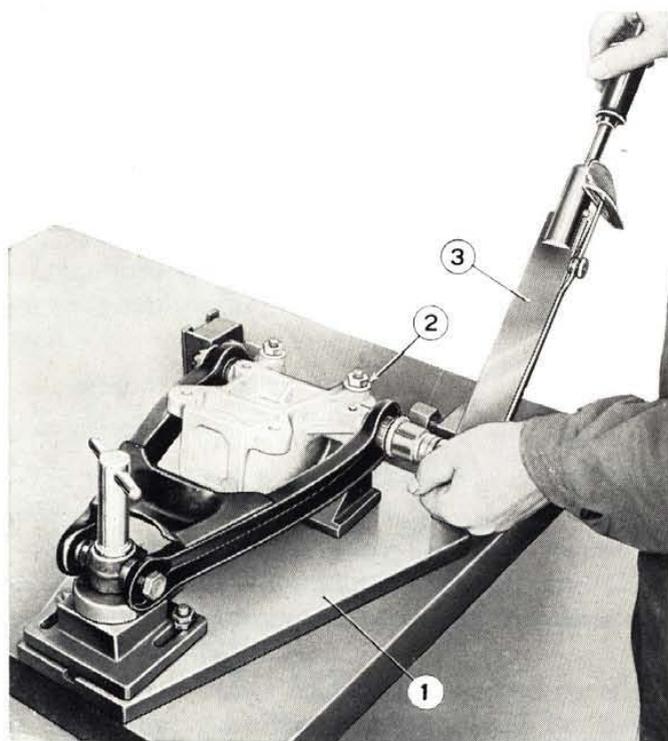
Tightening upper control arm pivot bar nuts. 1. Fixture A. 74023. - 2. Coil spring mounting bracket. - 3. Torque wrench.
